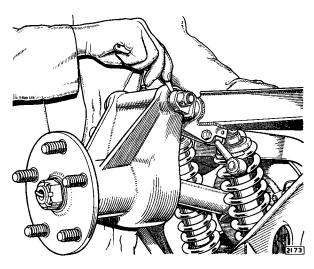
Using feeler gauges to measure the clearance between the hub carrier oil seal tracks and wishbone fork.
